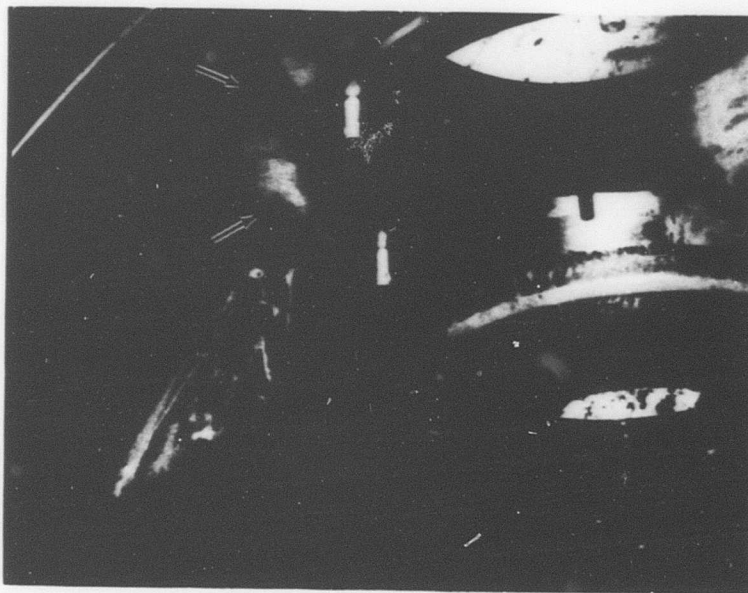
Oil Leak Coming From the Main Bearing Ring-to-Housing Bond After Vacuum Impregnation.
